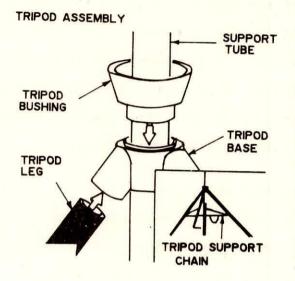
TRIPOD ASSEMBLY SHOWING THE ARRANGEMENT OF TRIPOD BASE TRIPOD BUSHING AND DETECHABLE TRIPOD LEGS
